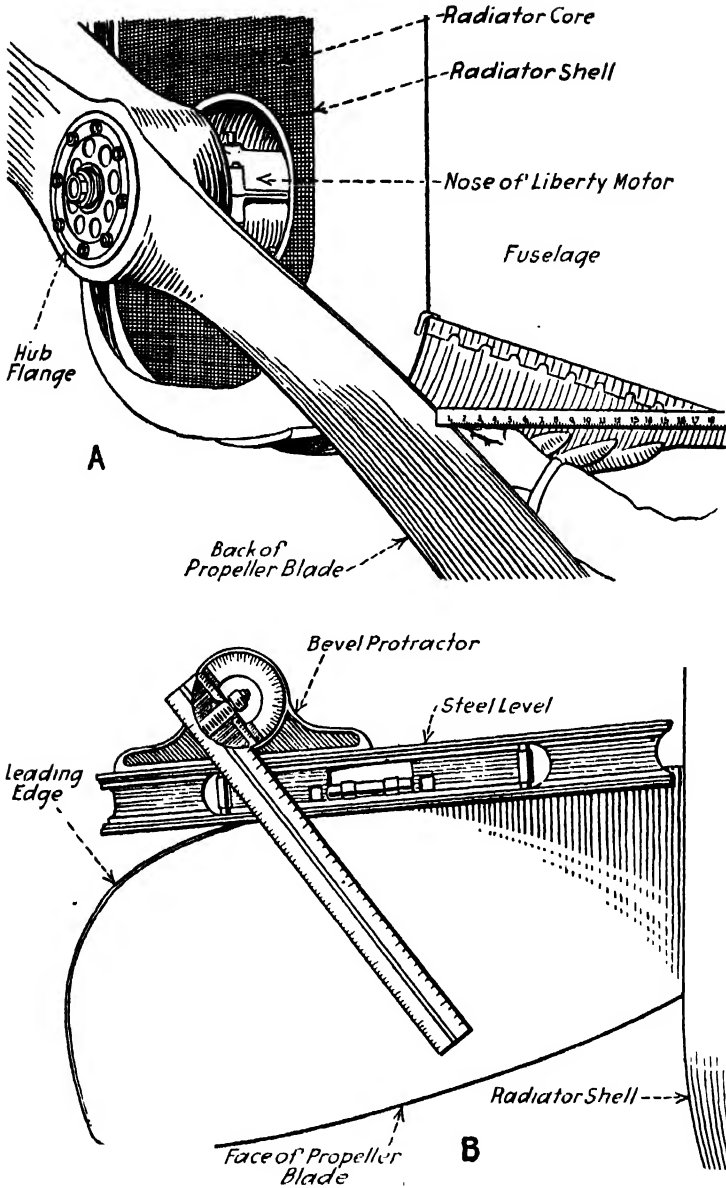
Drawing at A Shows Method of Testing Propeller for Track. Use of Bevel Protractor Depicted at B for Testing Pitch of Blades.
